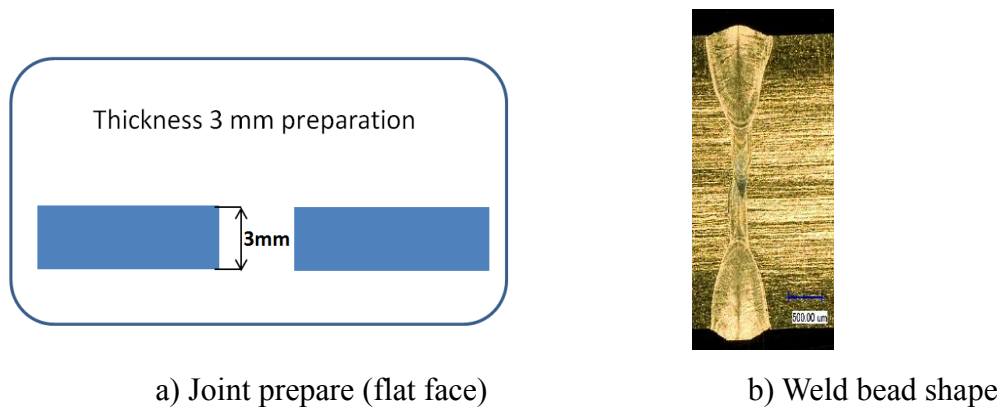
Optimum welding cross section (Autogenous laser welding 1 kW power)
